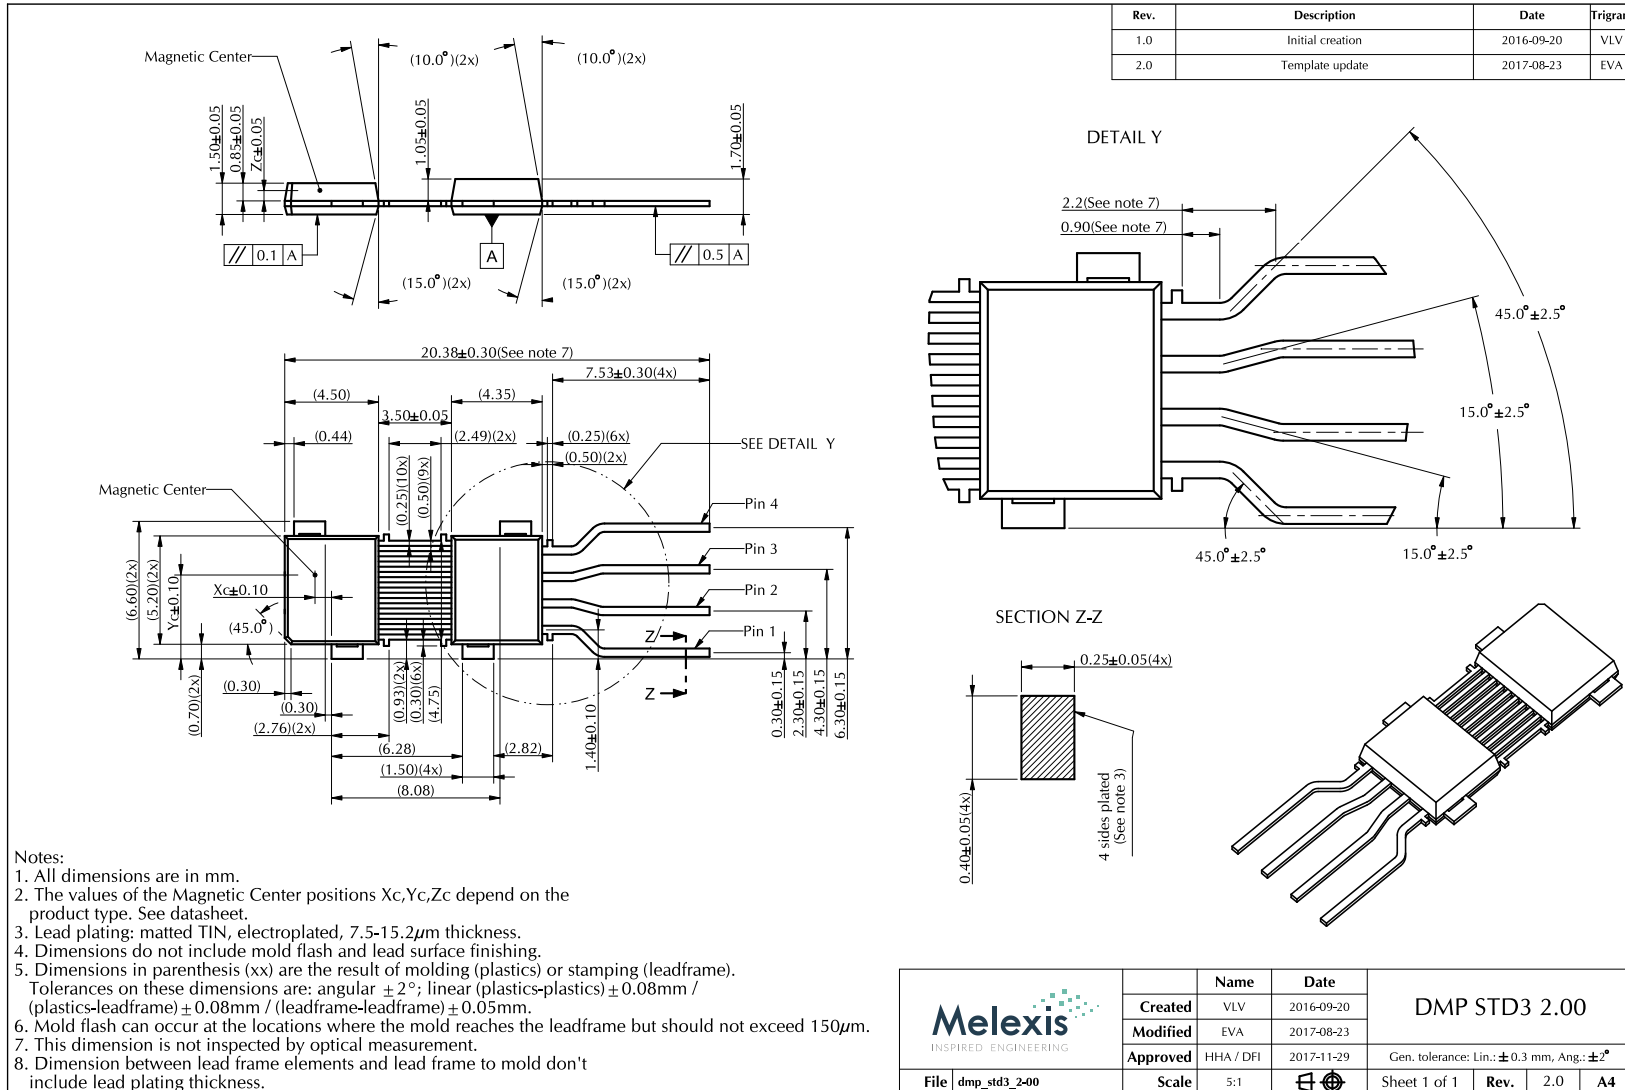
DMP-4 STD3 2.00 Package Outline Drawing
